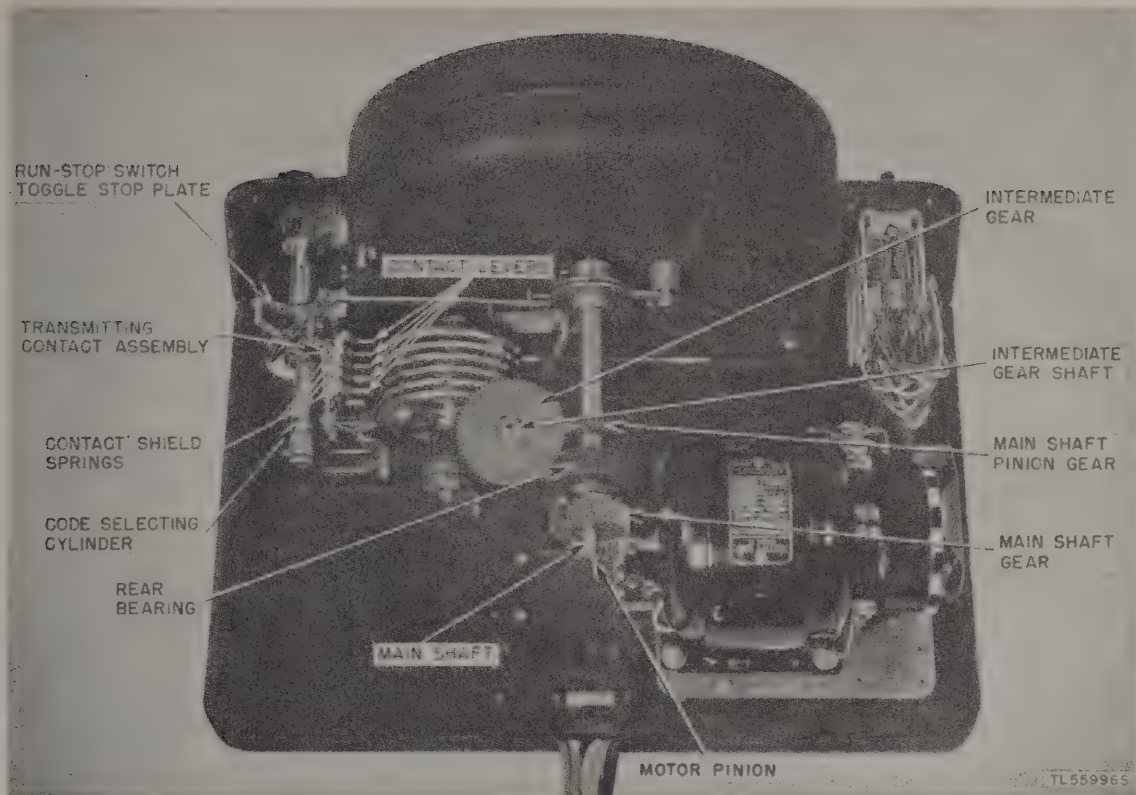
Distortion Test Set TS-383/GG, top rear view, cover removed.
